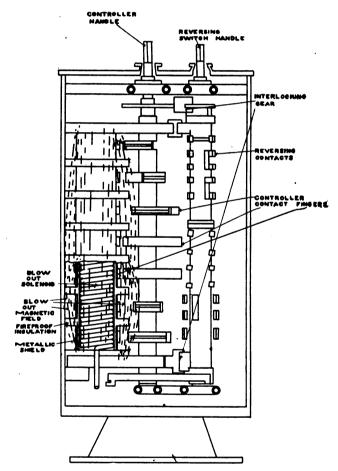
Diagram of Controller, Showing Insulated Drum Reversing Handle, Blowout Magnet, Etc.
